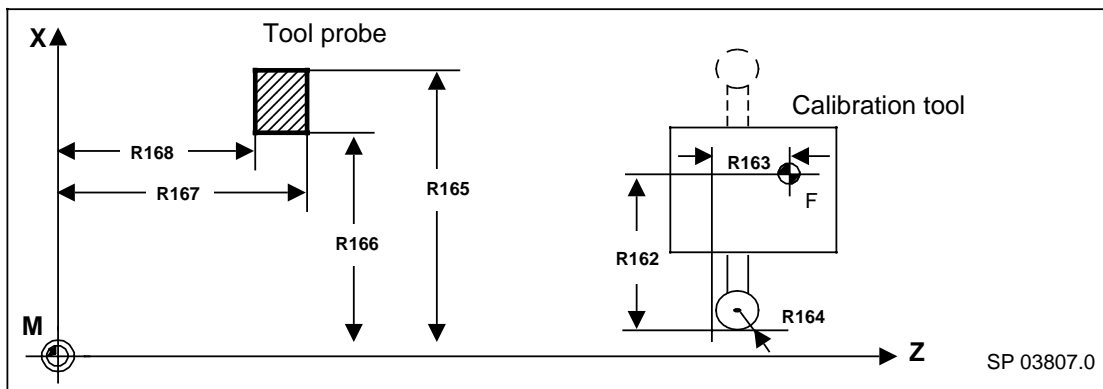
Overview MDC: Tool probe: Calibration tool (X axis mirrored)
